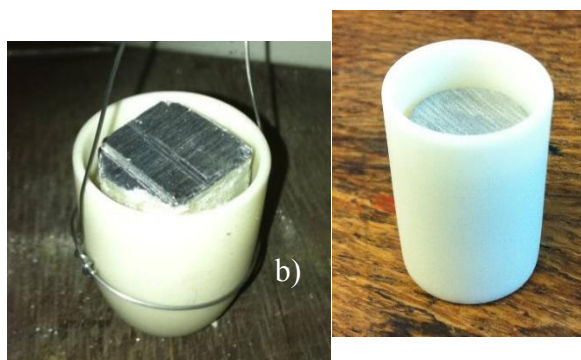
The alumina crucible used for melting a) conical shape b) cylindrical shape
